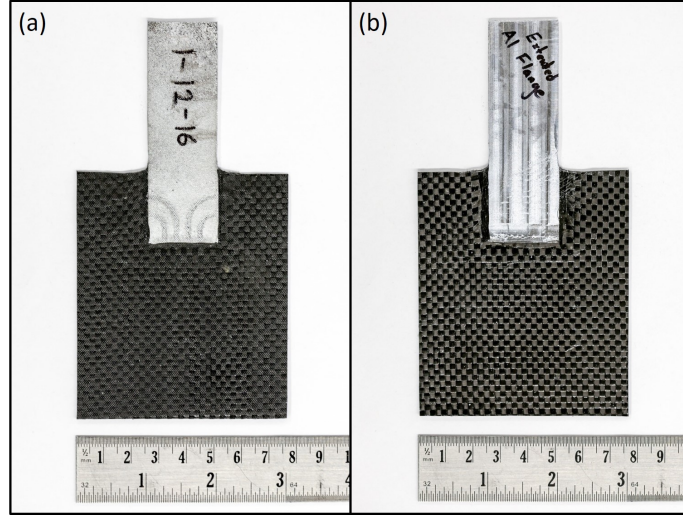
CF-Al curved channel tensile specimen with the flange feature. (a) Front, (b) Back.
